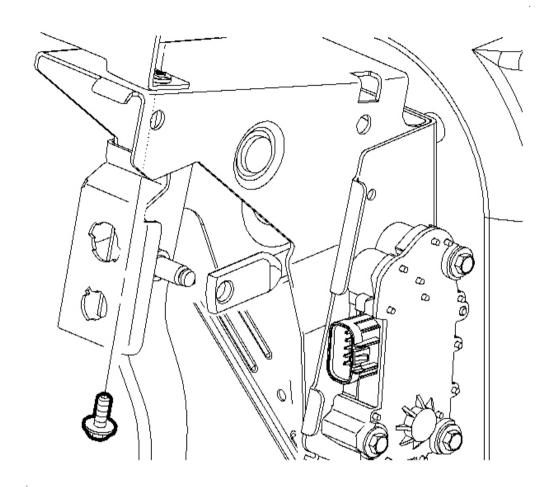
Removing/Installing Brake Pedal Bracket Courtesy of GENERAL MOTORS CORP.
